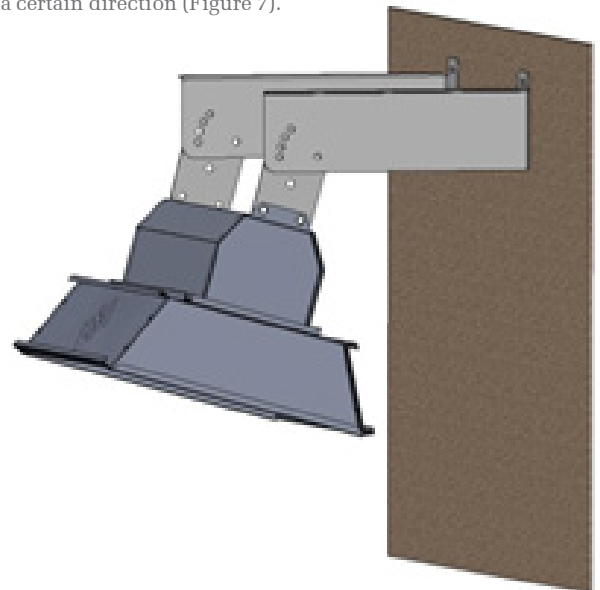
Wall mounted with bracket. Model SCR-ECO.
